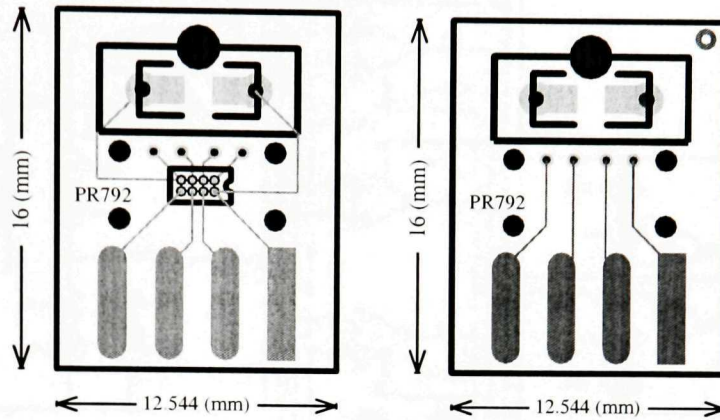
Top and bottom layer layout for edge connector adapter board PR792
